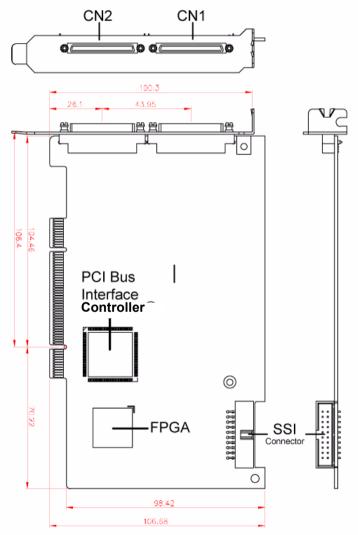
PCI-9524 PCB Layout and Mechanical Drawing
